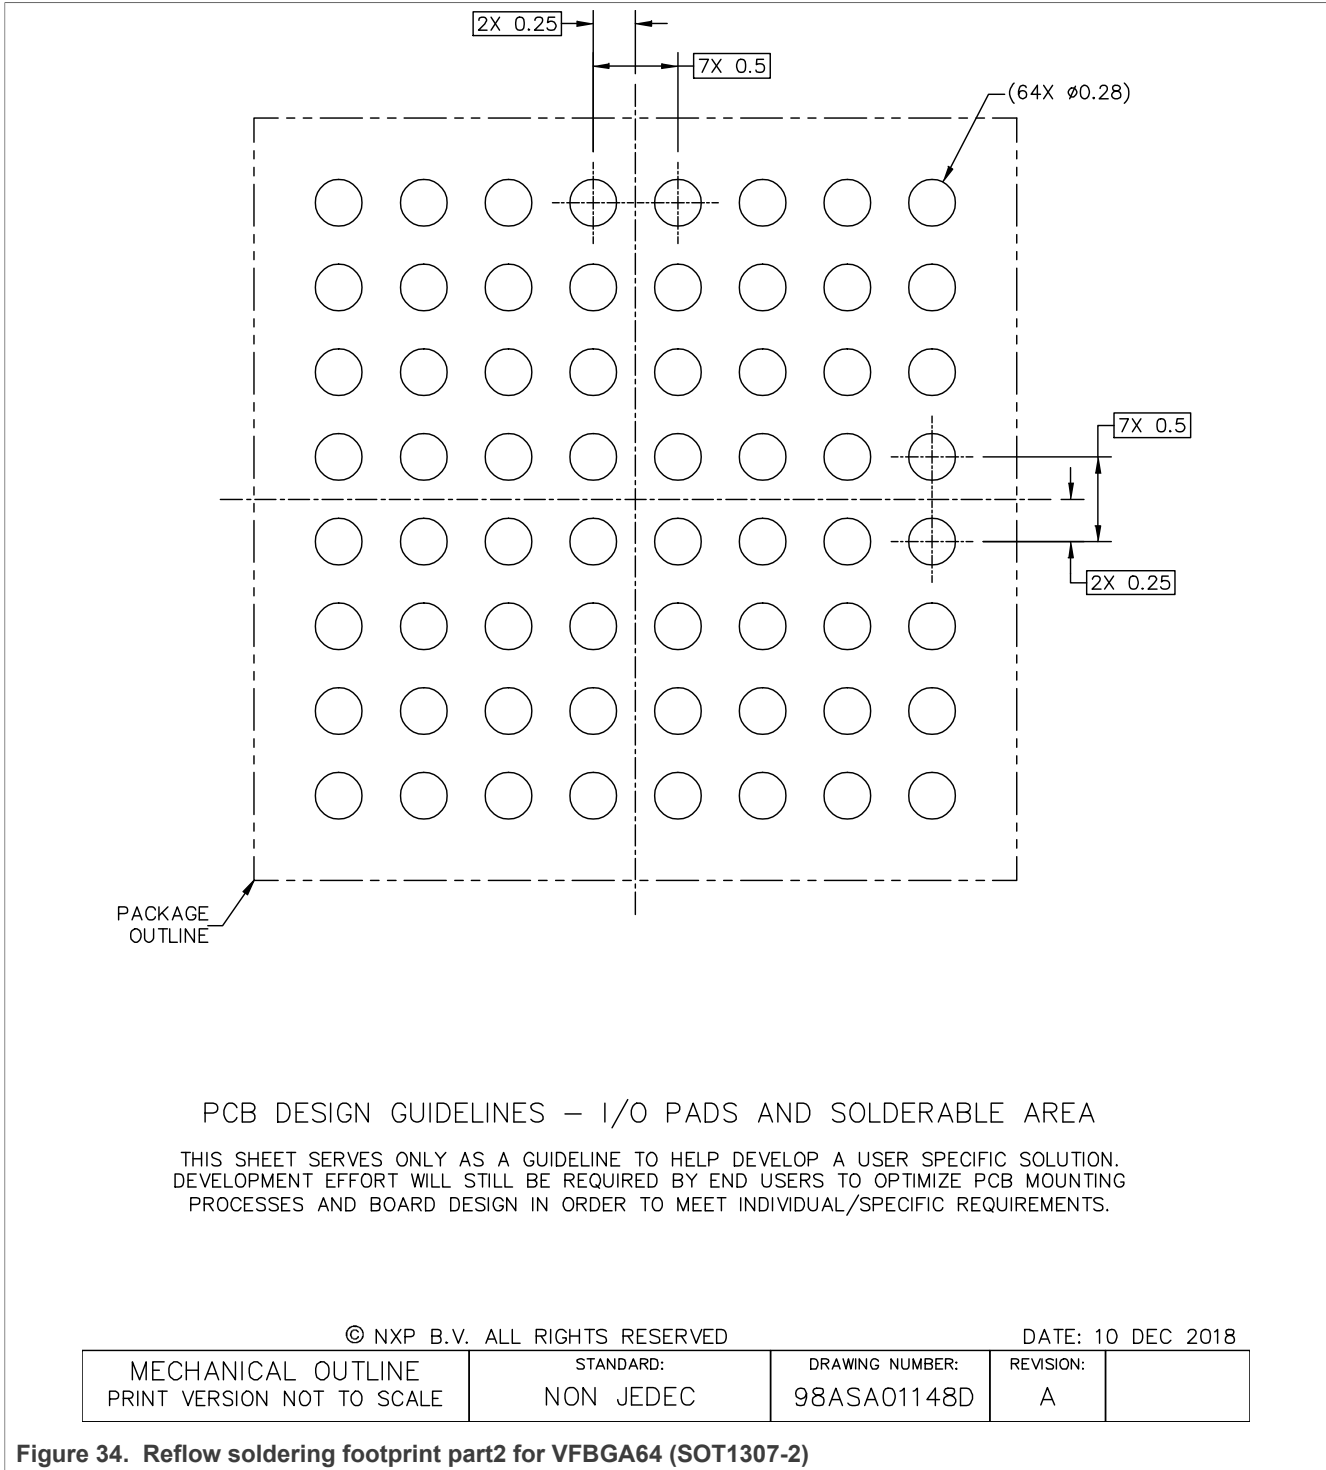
Reflow soldering footprint part2 for VFBGA64 (SOT1307-2)
